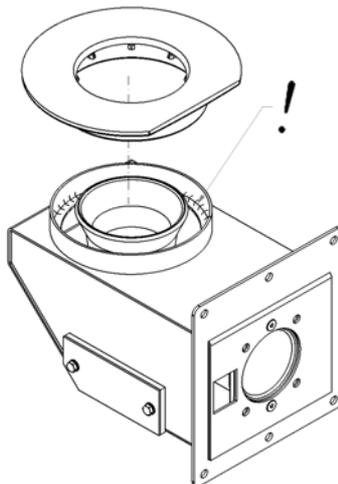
Boiler conversion from the right to the left version – dismantling of burner and blind flange
